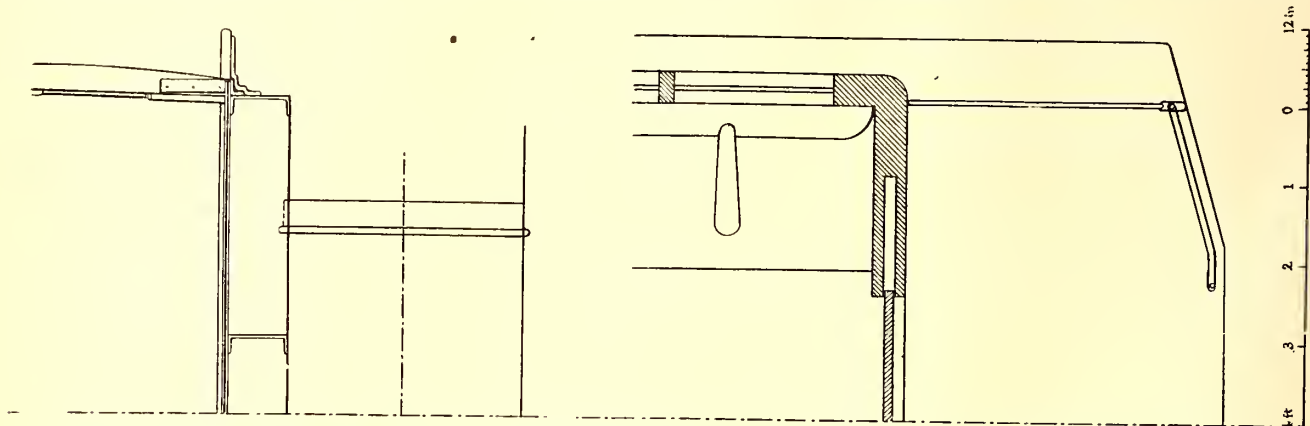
PLAN AND CROSS SECTION OF LONDON METROPOLITAN RAILWAY, SHOWING RUNNING BOARD
